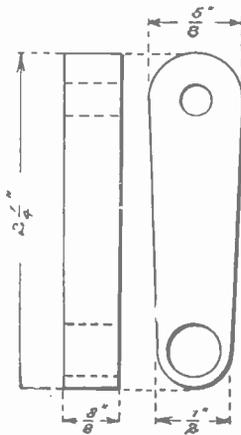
BRASS ARM, SIDE VIEW AND PLAN
